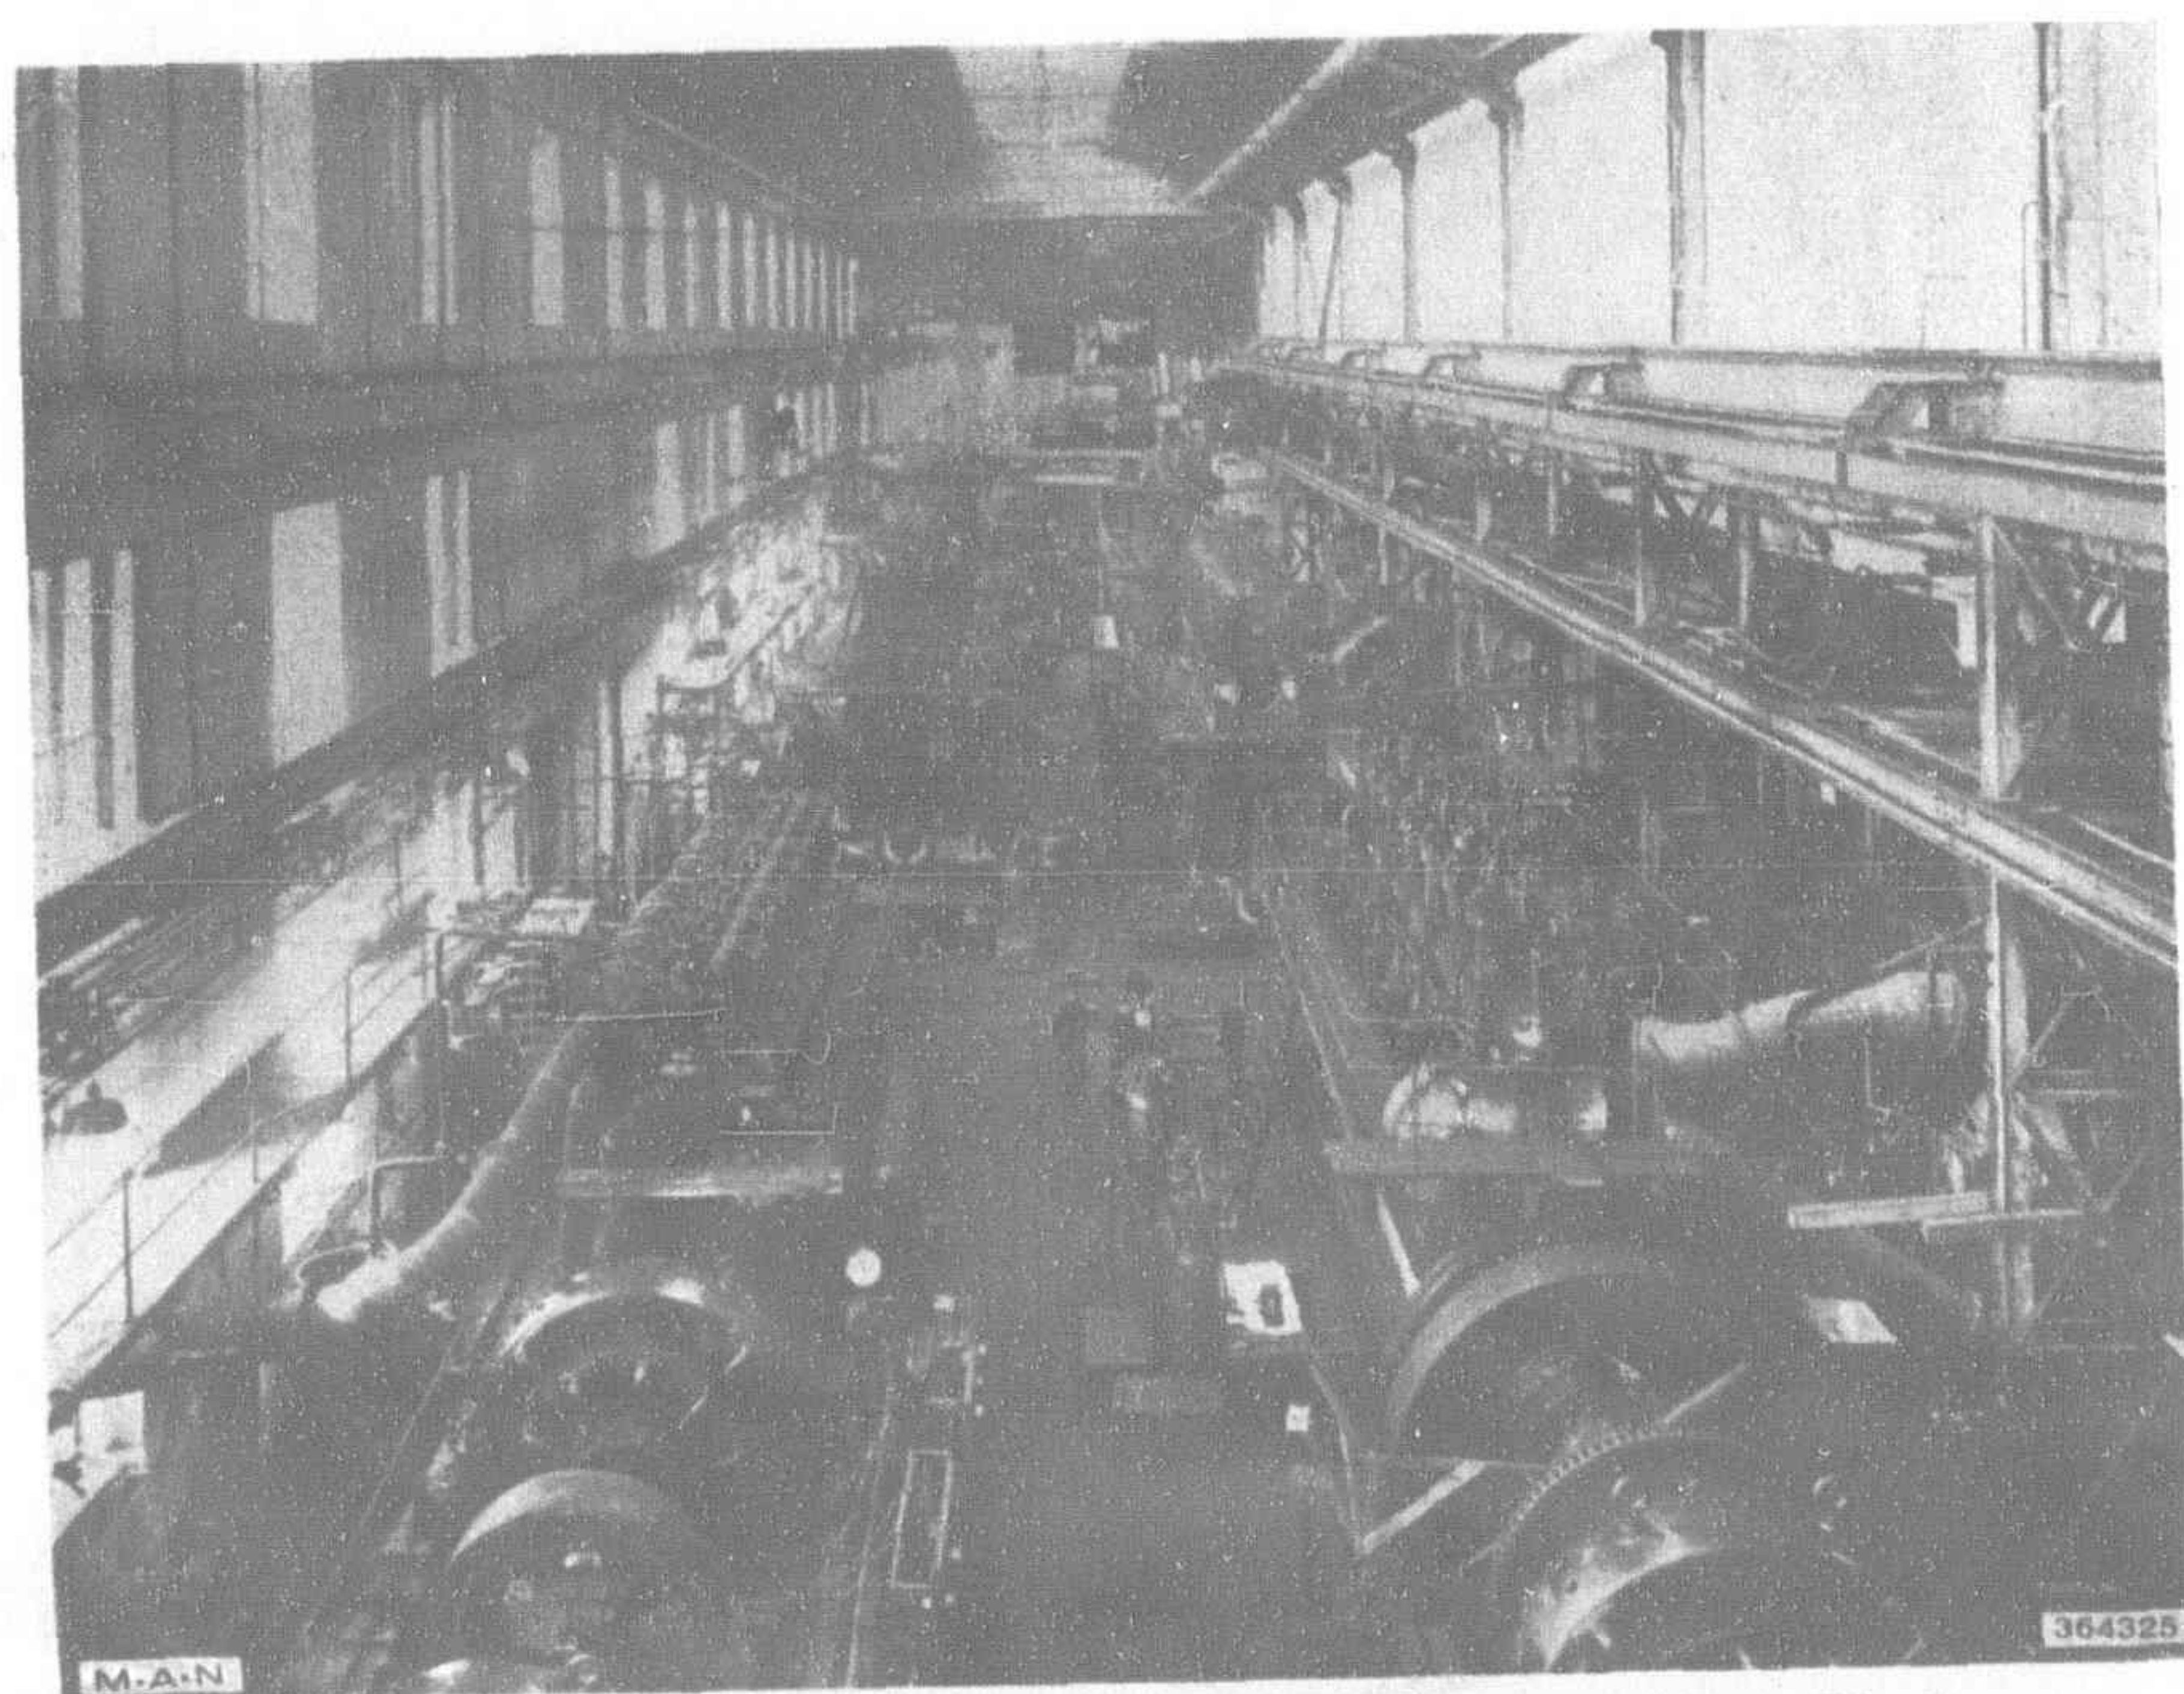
Testing Bay for Diesel Engines at the M.A.N. Works
